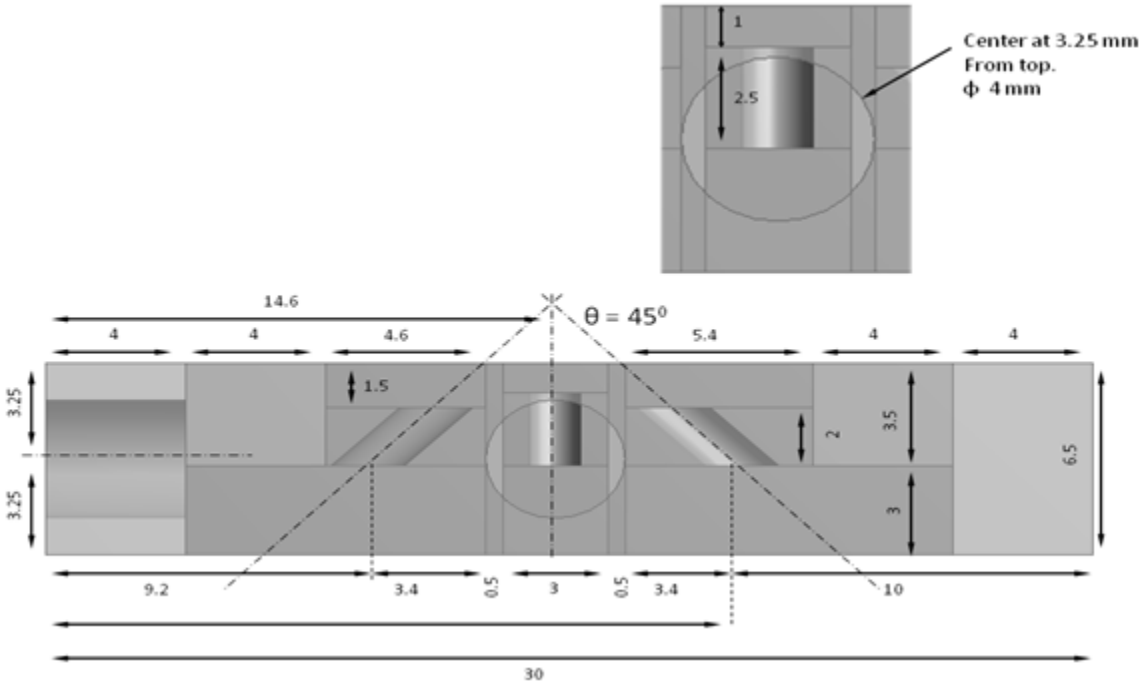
Different views and dimensions of the cooler designed for single-sided single channel multi chip power module.
